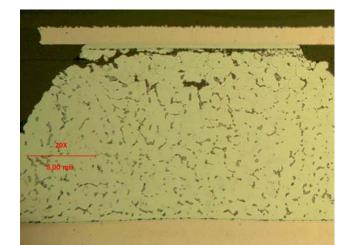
Cross-Section of a wbPBGA Solder Joint Failure for Unit 5 on Board 3, for Leg 13
